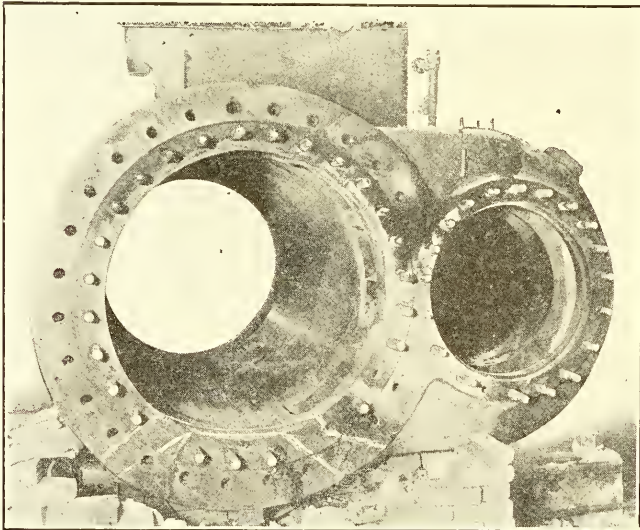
Flange Welded on the 5-Ton High-Pressure Cylinder.
